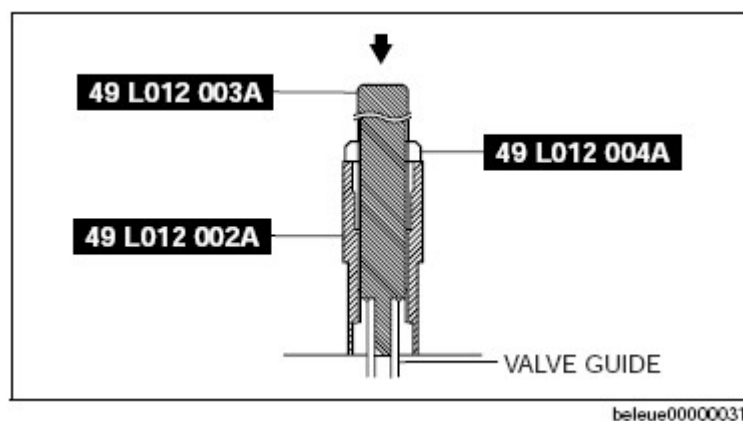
Tapping Valve Guide In From Cam Side Using SSTs
